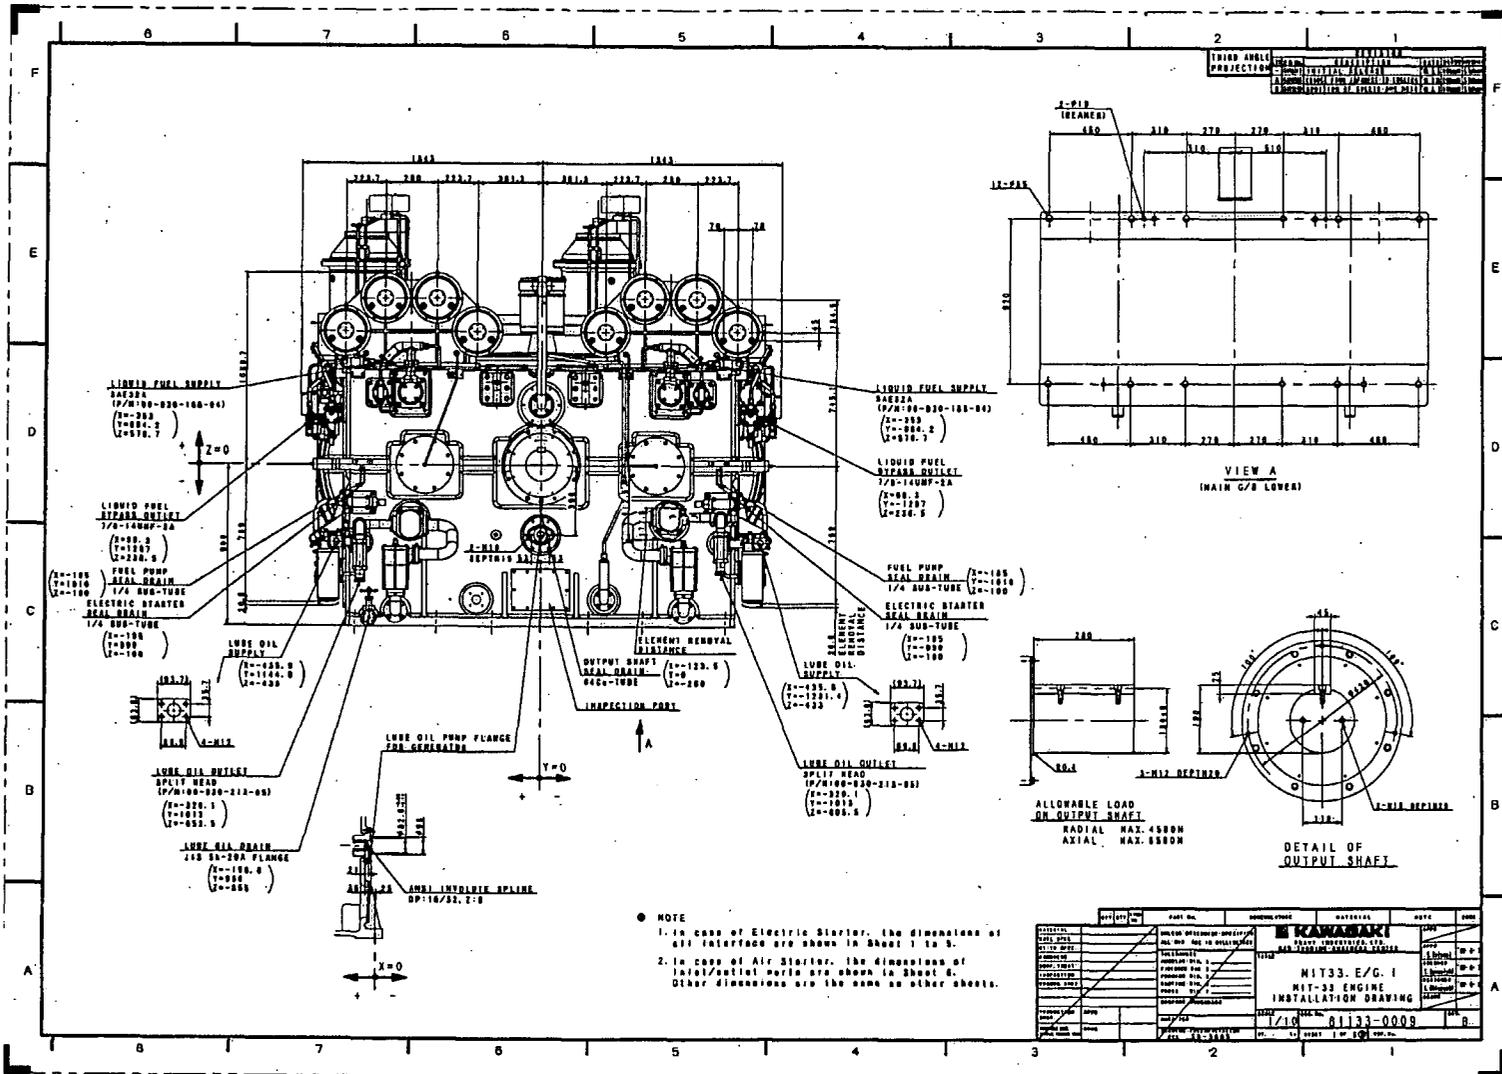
Installation Drawing of Gas Turbine Assembly (sheet 1)
